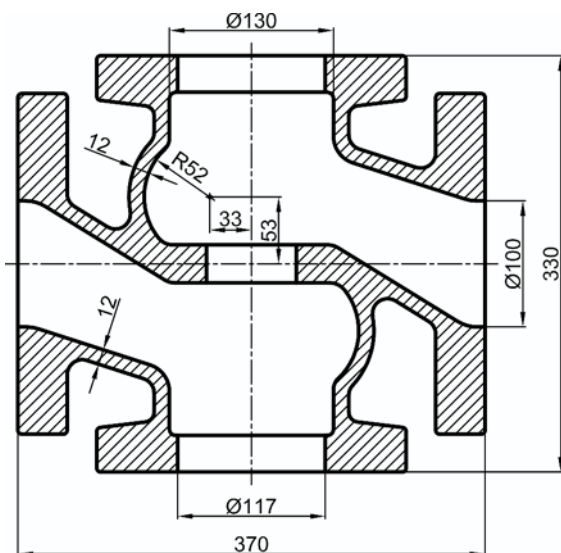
Layout and dimensions of the three-way globe valve housing DN100 PN40
